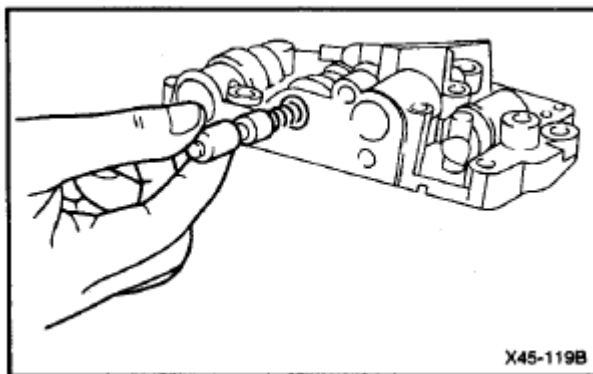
Installing N-R Control Spring & N-R Control Valve
